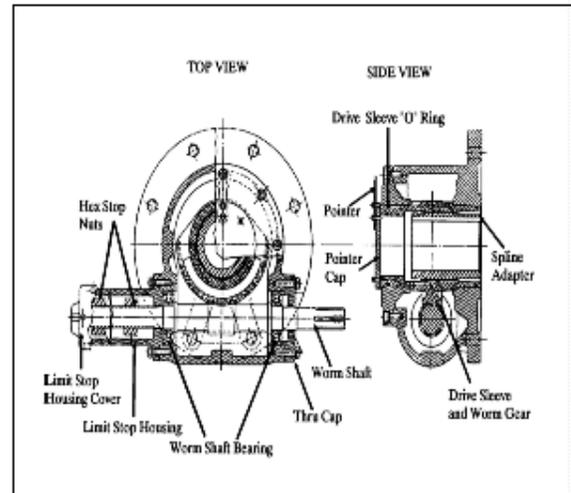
HBC-0 through 3 Operator Top and Side Views
